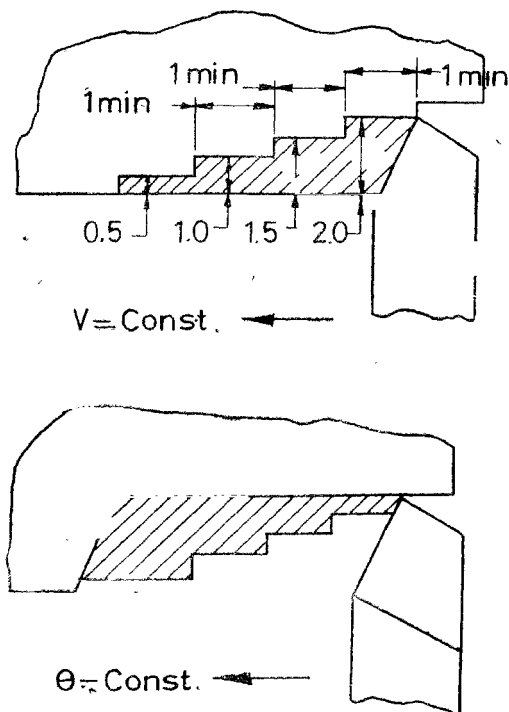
Test workpiece for both adaptive and non-adaptive processes.
